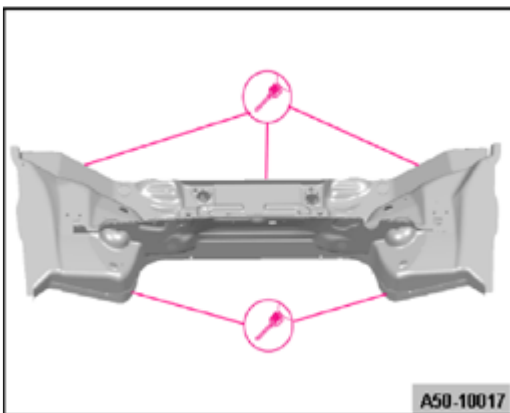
Punching Holes For Gas-Shielded Arc Plug Weld Seam
